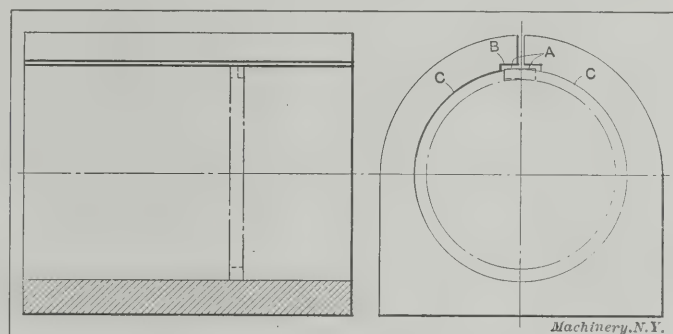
Fixture for Holding the Rings while they are being secured in the Grinding Arbor
